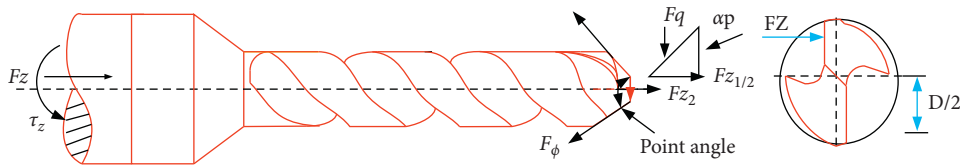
Force on twist drill bit during bone drilling of the bone specimen.
